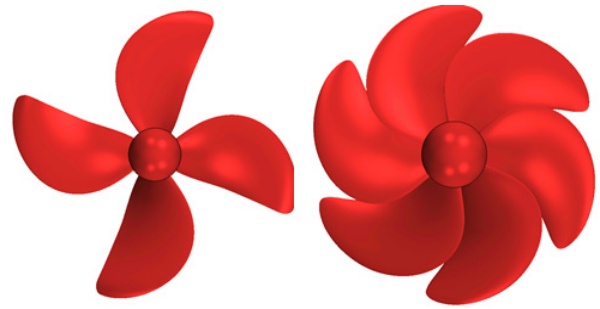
Geometry of propeller (left: 176K, right: 8600TEU)
